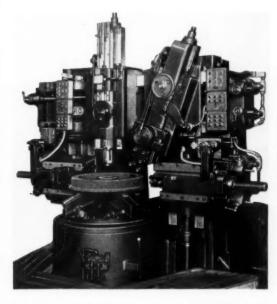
A modern machine tool which cuts the diameter of rolled-steel car wheels to size. With this machine tool 6 car wheels are obtained in an hour. The center hole is bored while the outside diameter is turned. This machine is completely automatic. (Cincinnati Planer Co.
